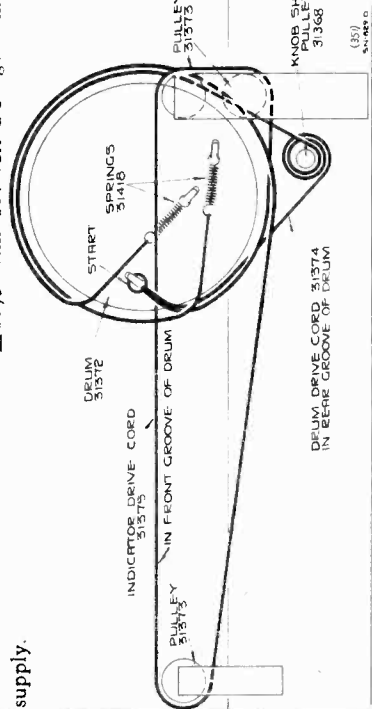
(At Left) Arrangement of Drive Cords for Timing Condenser and Dial Indicator
